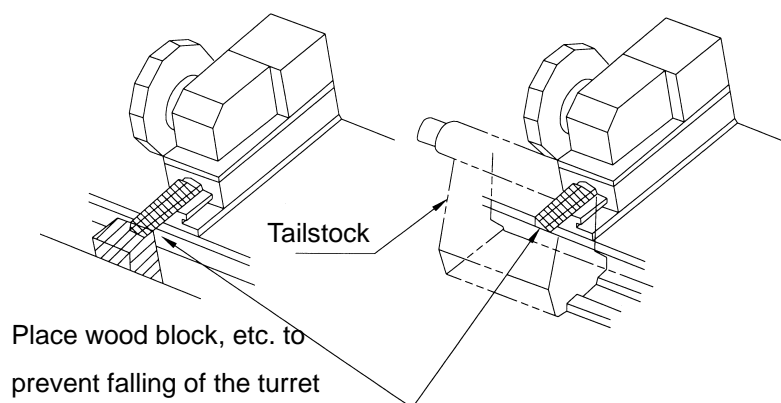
Caution on Checking the X-axis Ball Screw
